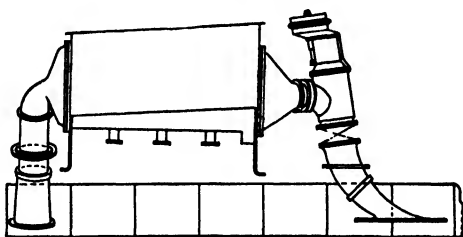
Condenser fitted with scoop and auxiliary circulating pump. (*Jour. Am. Soc. Naval Eng.*)
